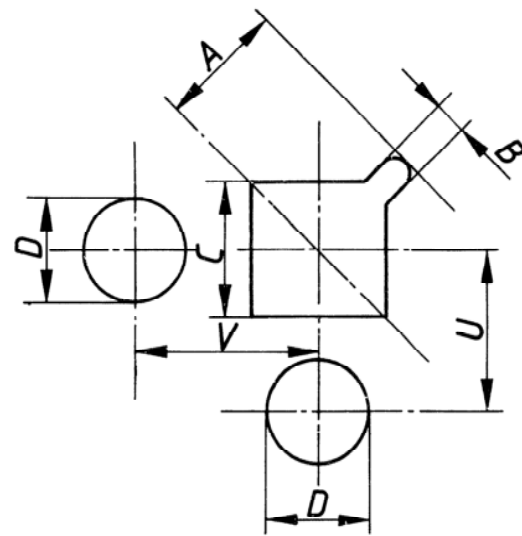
Spindle and drive holes in flange No. 1 (see 4.2.3)
